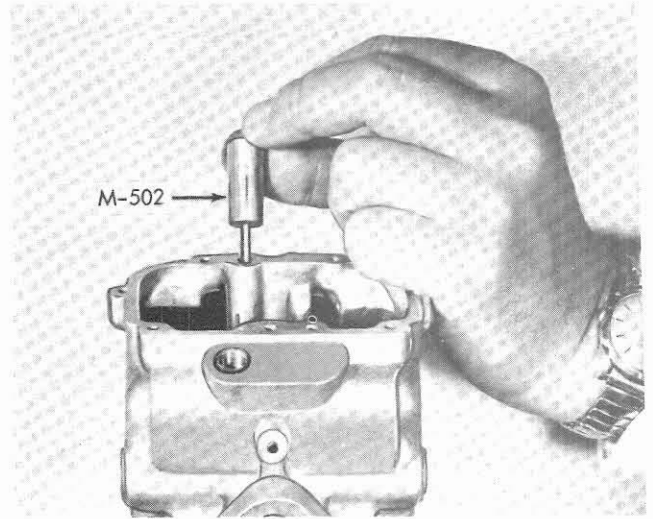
Locating Pump-Discharge Valve Prior to Driving It Into Final Position
